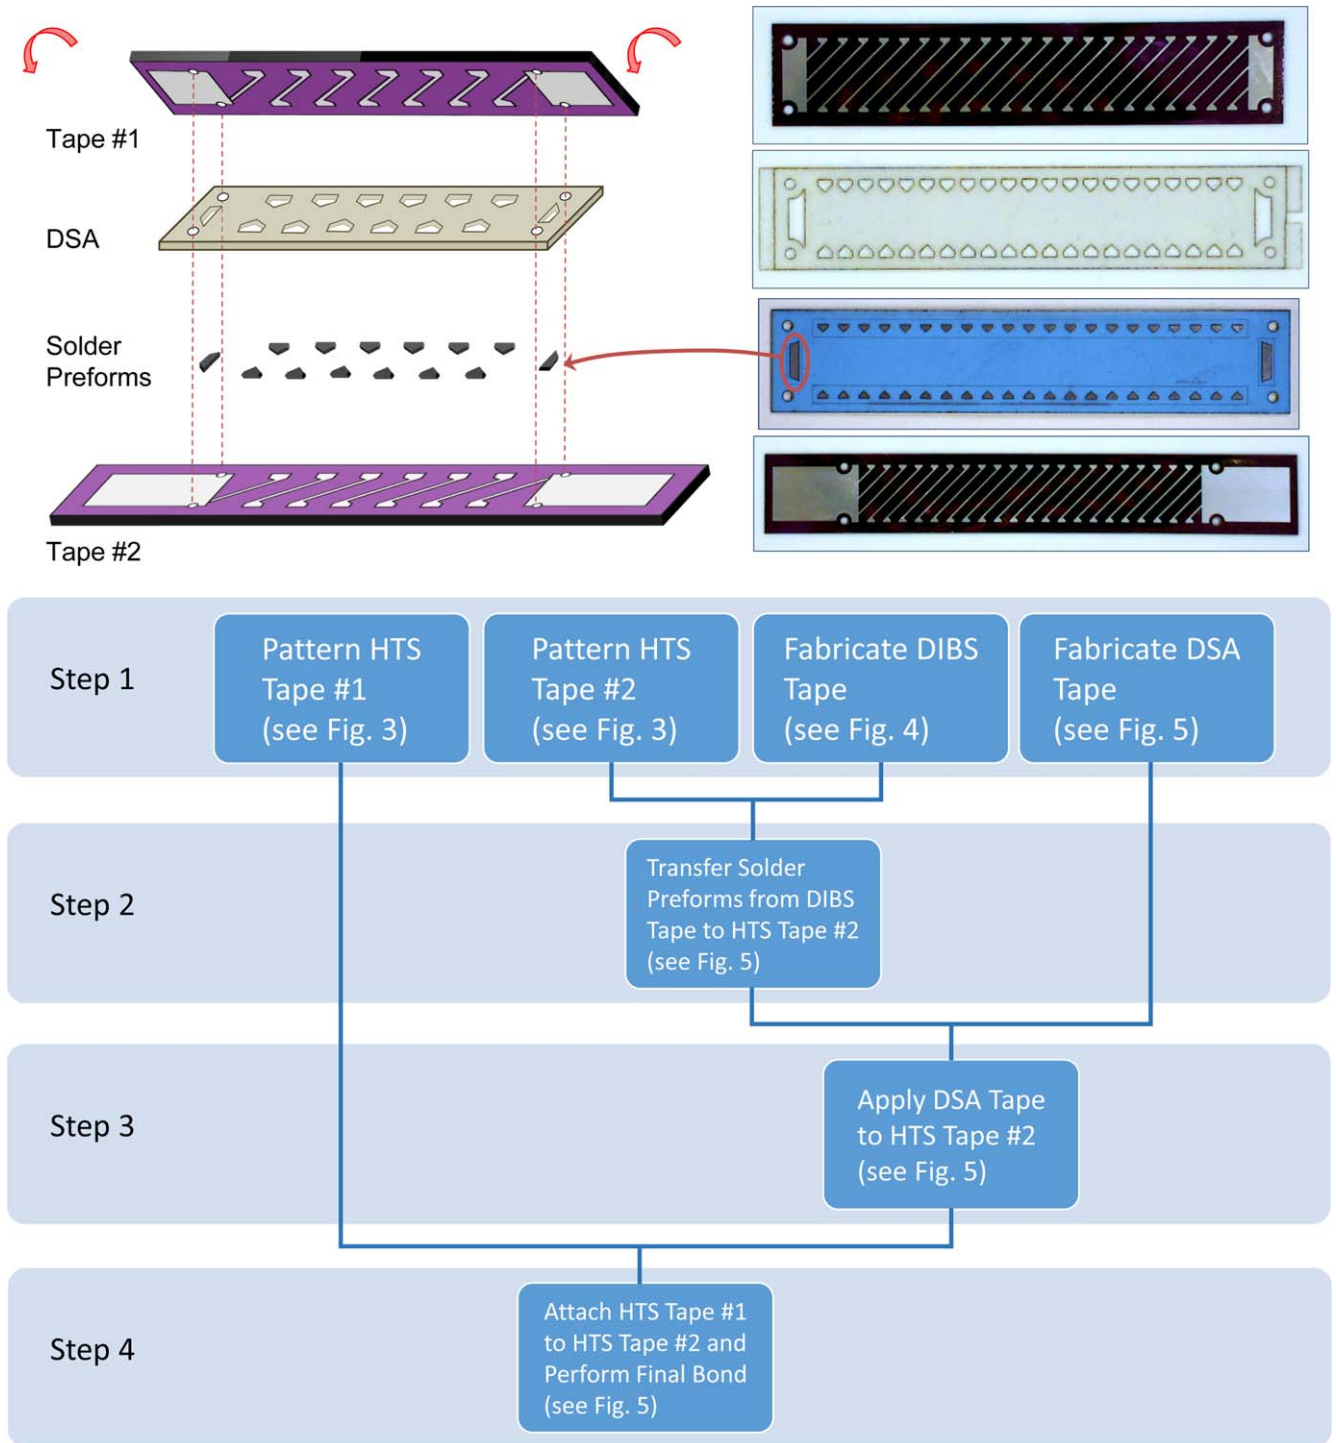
(Top left) Illustration of final components in assembled tape. (Top right) Actual components used to fabricate the low AC loss tape assembly. Note: double-sided adhesive (DSA) shown with backing layers present and solder preforms shown attached to blue ‘low tack tape’ for the decal imprinting and bonding of solder (DIBS) procedure. Note dimensions are not to scale. (Bottom) Flow diagram summarizing the basic steps to fabricating the low AC loss tape assembly.
